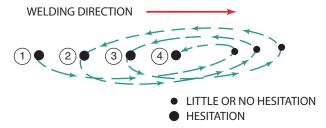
Weave pattern used to control the molten weld bead size.
